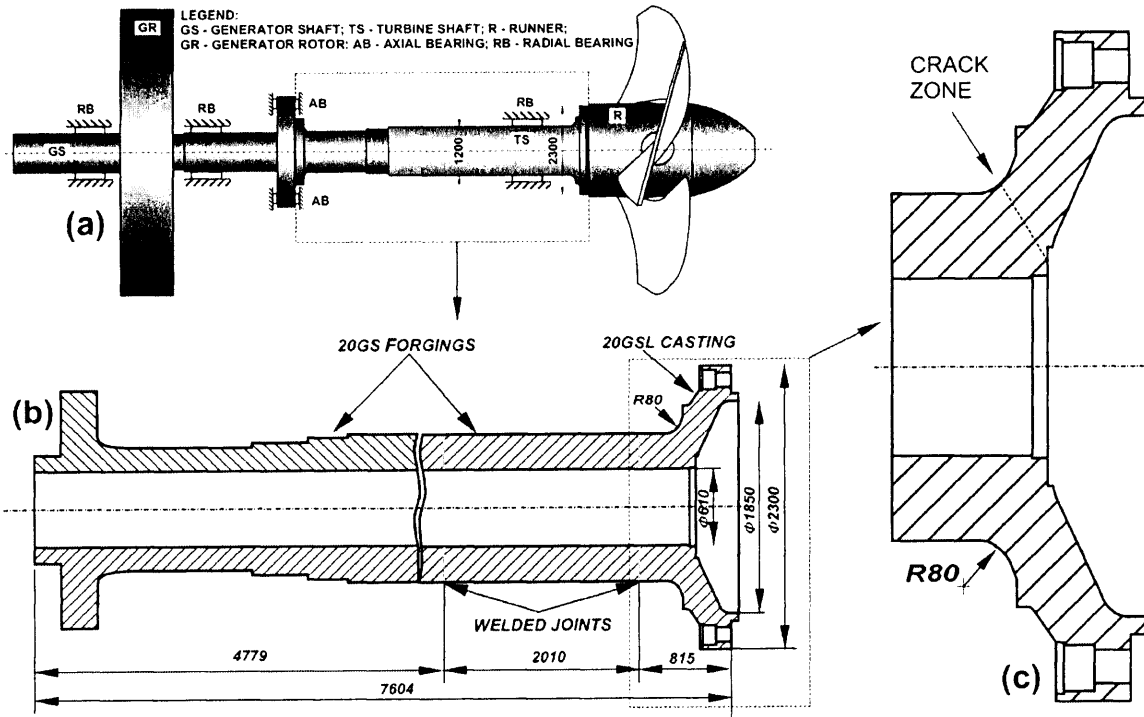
Position of crack on general assembly of hydraulic turbine shaft: (a) schematic presentation of generator, (b) longitudinal cross section of the hollow shaft, and (c) longitudinal cross section of flange with crack detection zone.
